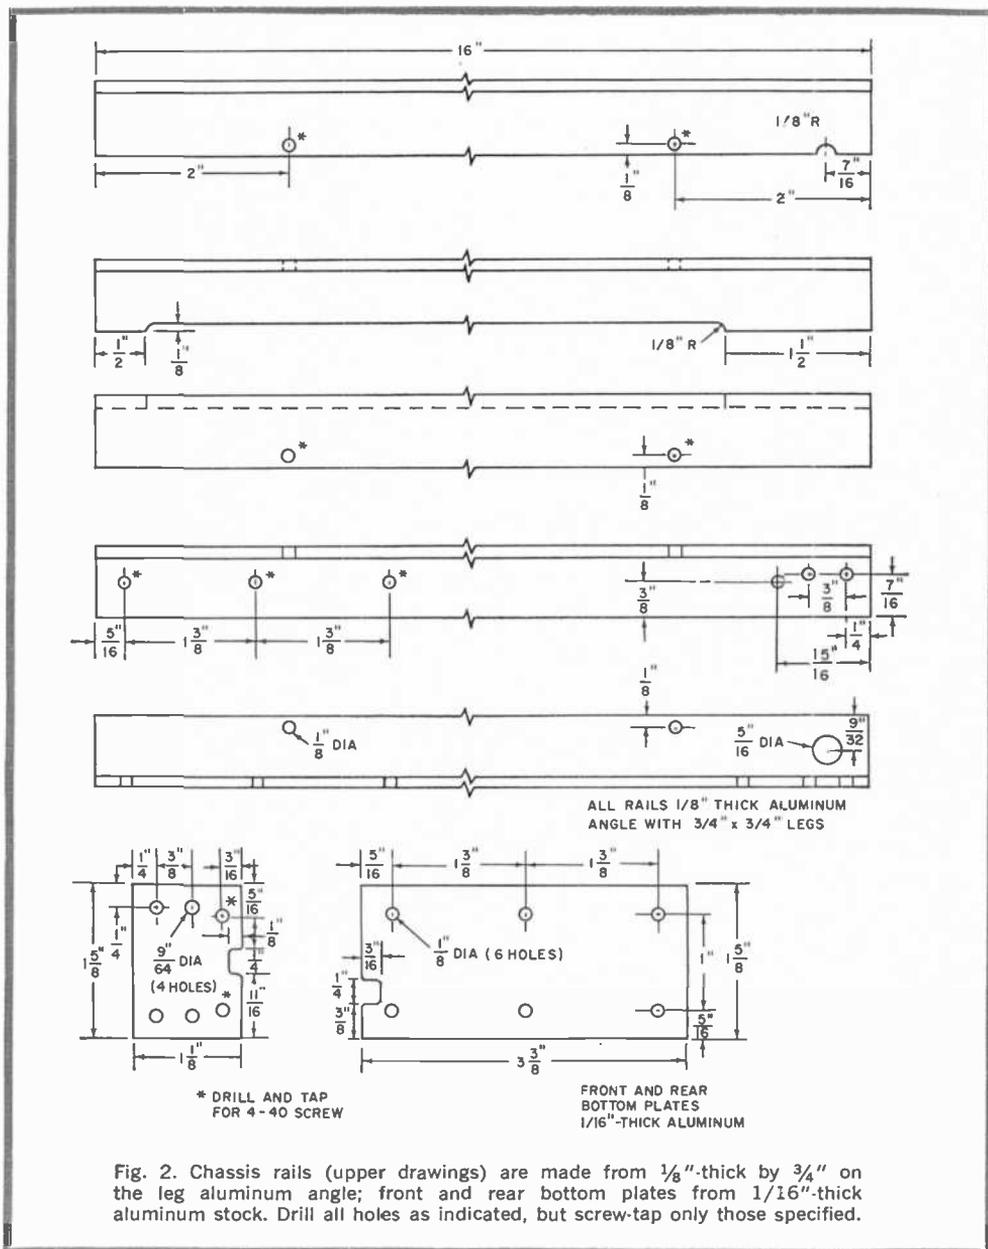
Chassis rails (upper drawings) are made from $\frac{1}{8}$ "-thick by $\frac{3}{4}$ " on the leg aluminum angle; front and rear bottom plates from $\frac{1}{16}$ "-thick aluminum stock. Drill all holes as indicated, but screw-tap only those specified.
